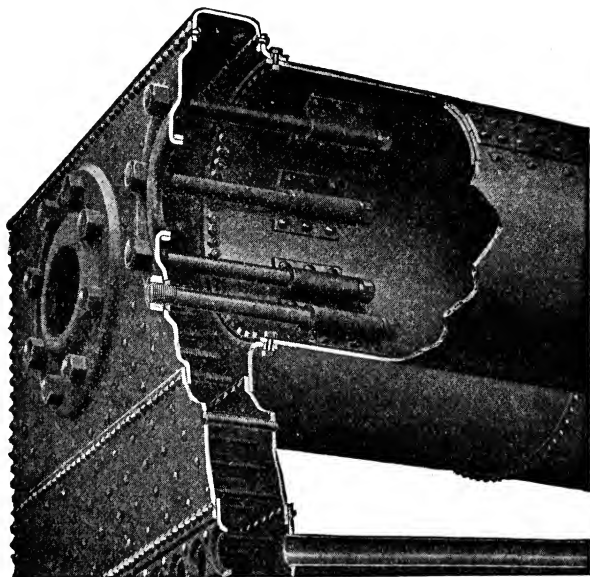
,993.—Edge Moor longitudinal header drum connection with header on two drum boiler, showing part of header and arrangement of stays.
